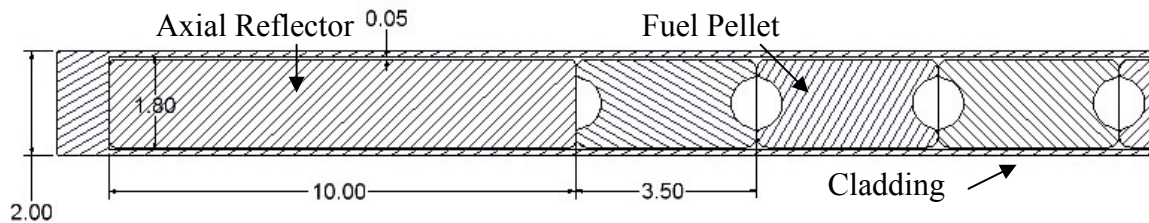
Cross Section View of Fuel Pin, all dimensions in cm
